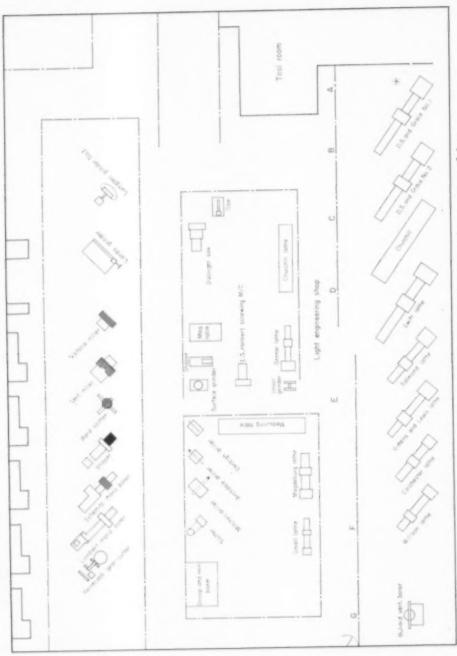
Machine on which investigation was carried out (*), and arrangement of shop.
